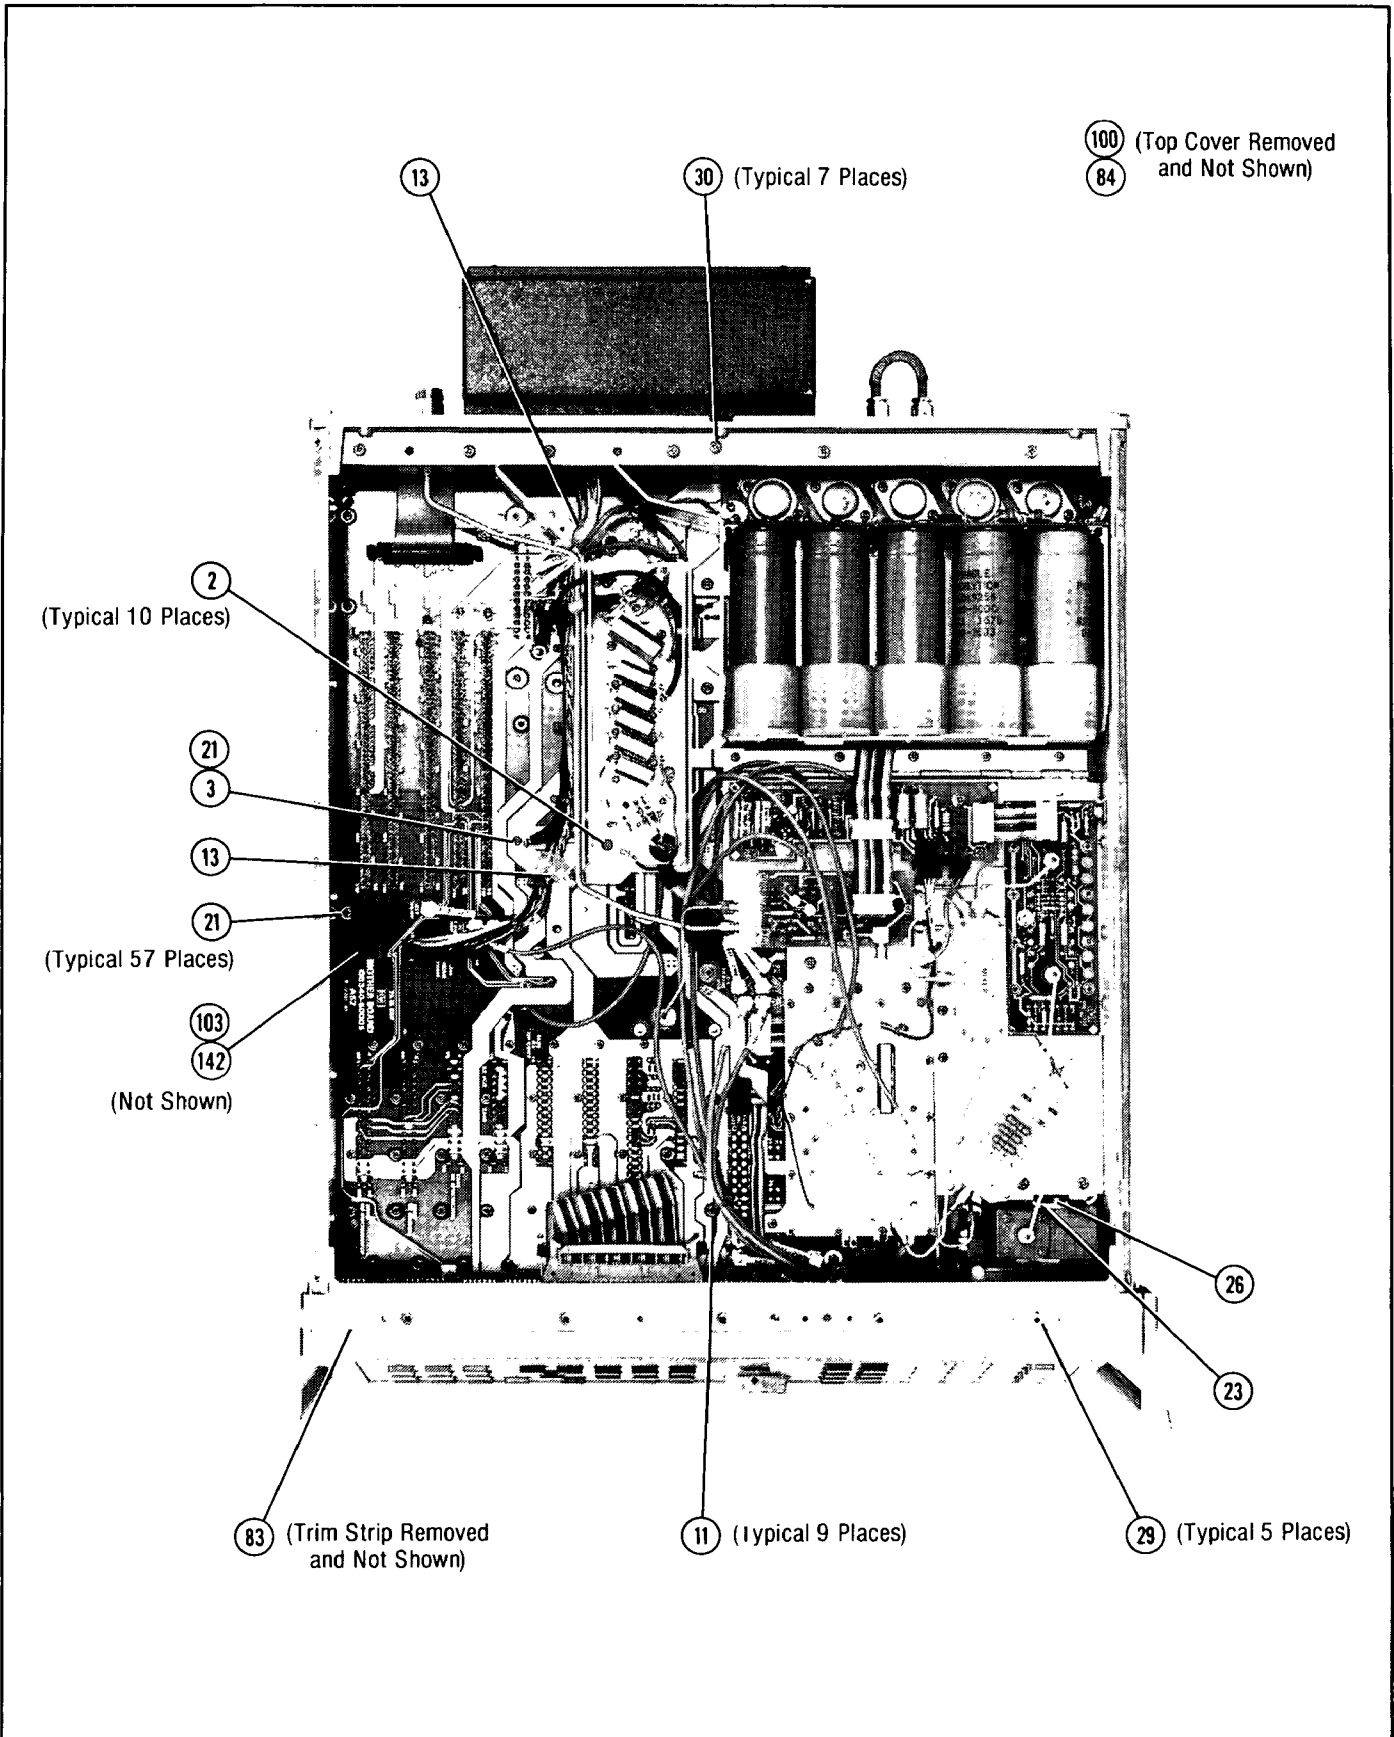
Miscellaneous Mechanical & Chassis Parts (4 of 9)
